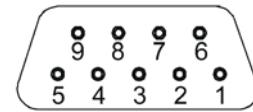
Mating connector X21: 9-pole Sub-D socket; view of the solder or crimp side
